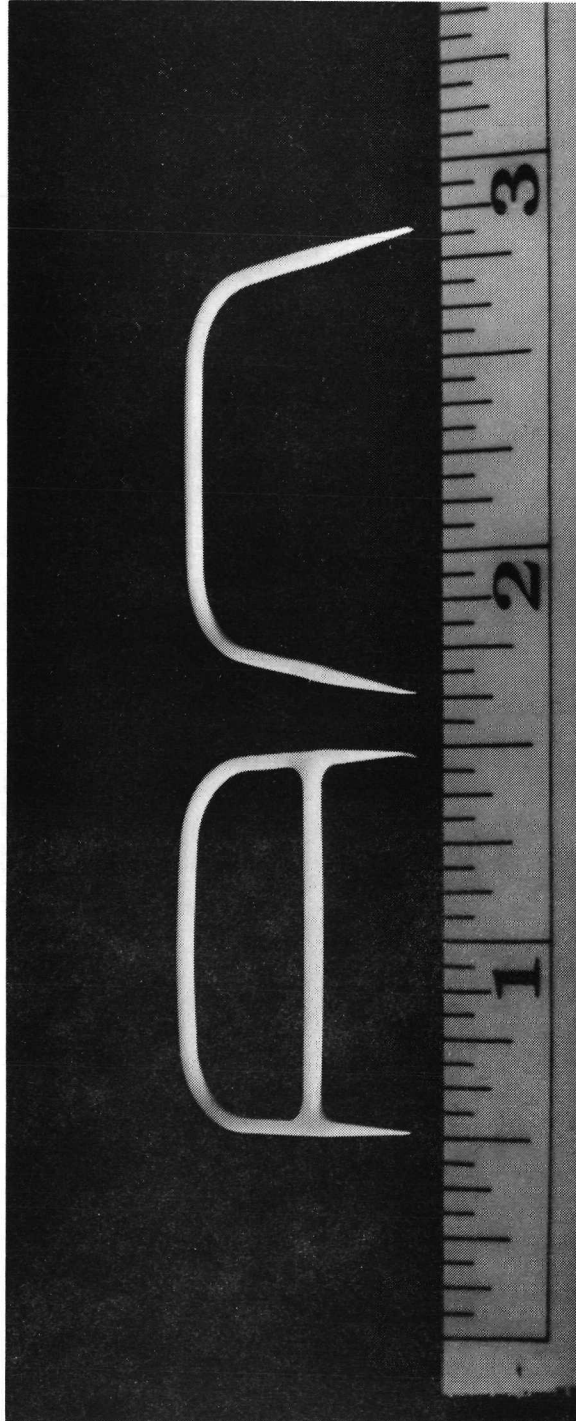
"U" WAVEGUIDE PARTS SHOWN AFTER FIRING
